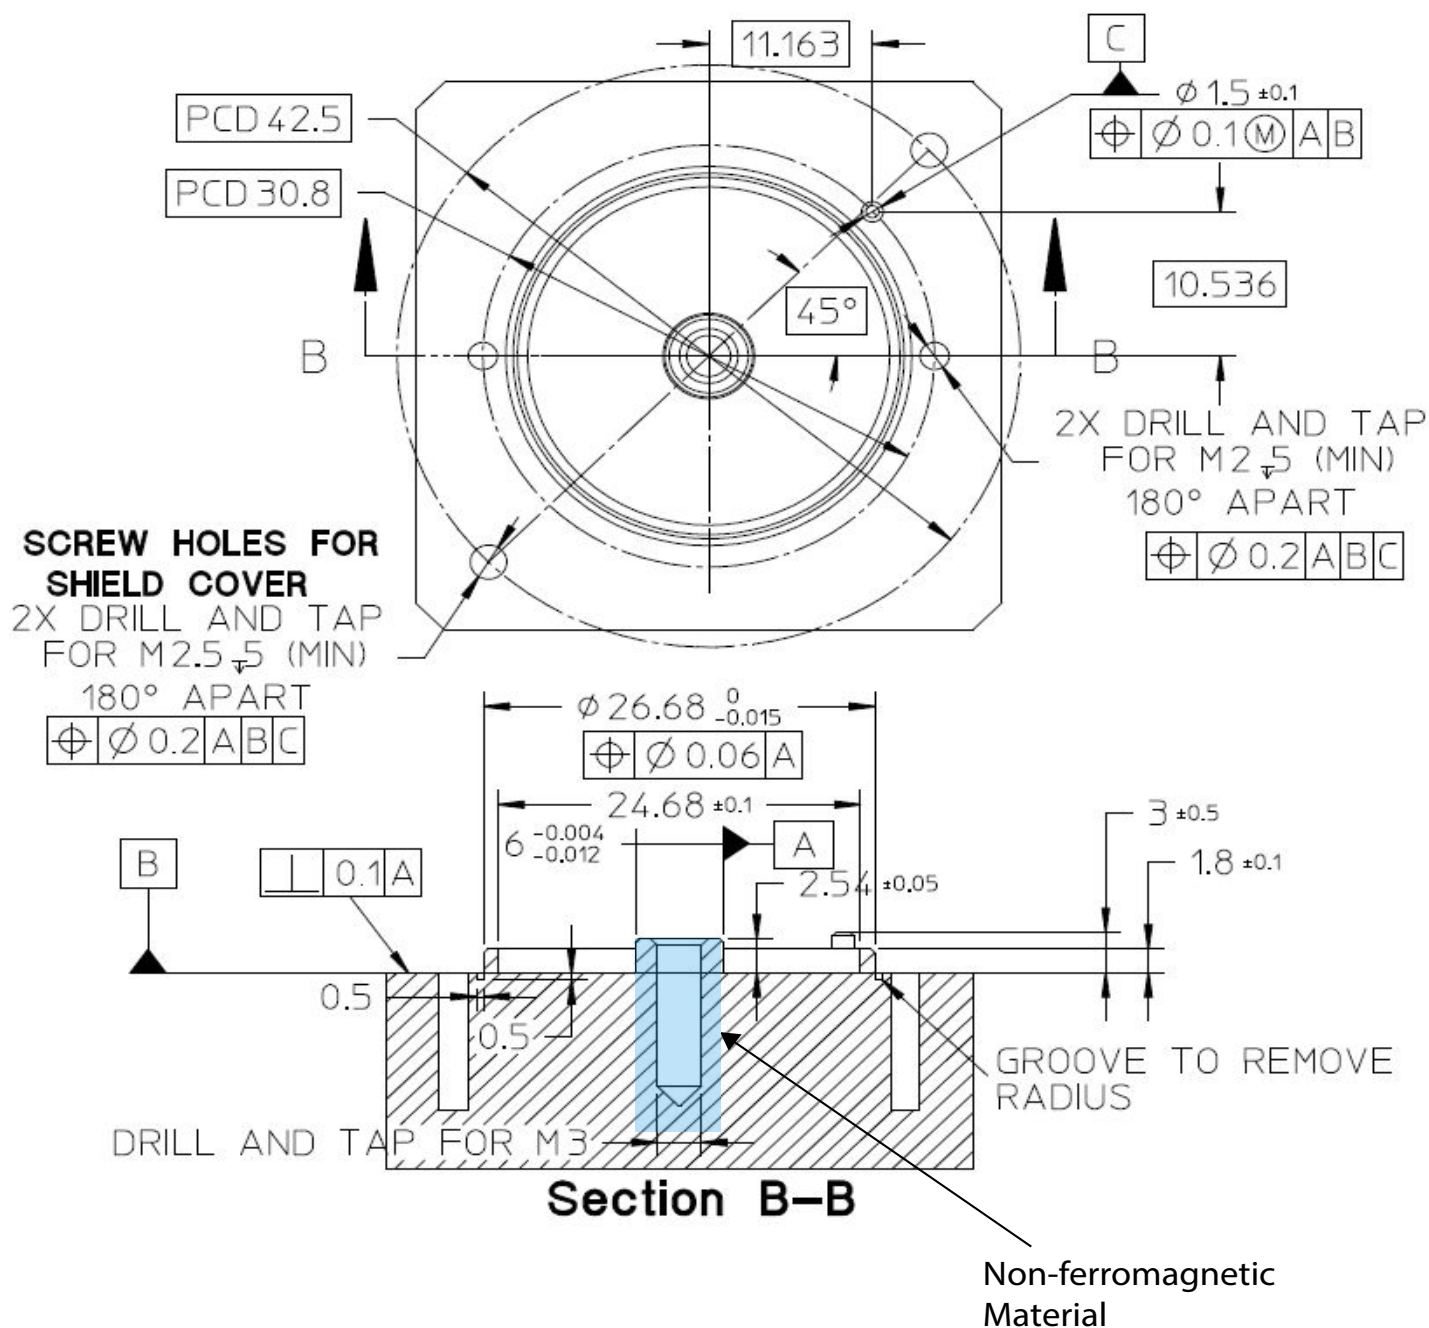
Mounting Dimensions When Using the Module Outer Diameter (OD) as the Position Guide
